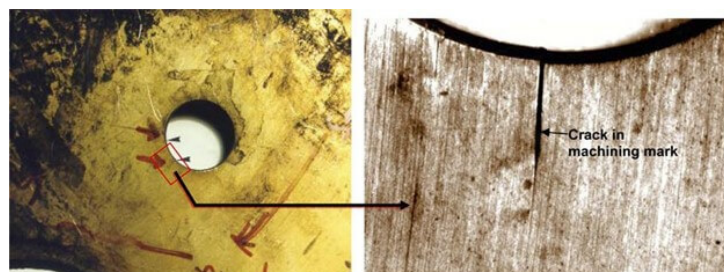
Failed compressor disk caused by crack initiation at deep machining marks [1]
